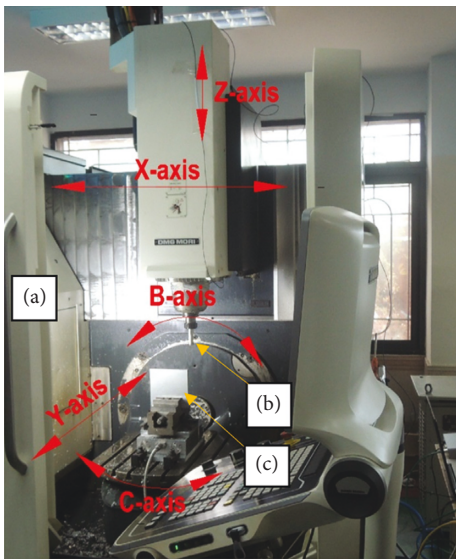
Experimental setup: a: DMU 50 CNC milling 5-axis machine; b: tool; c: workpiece (with permission from [2] (open access)).
